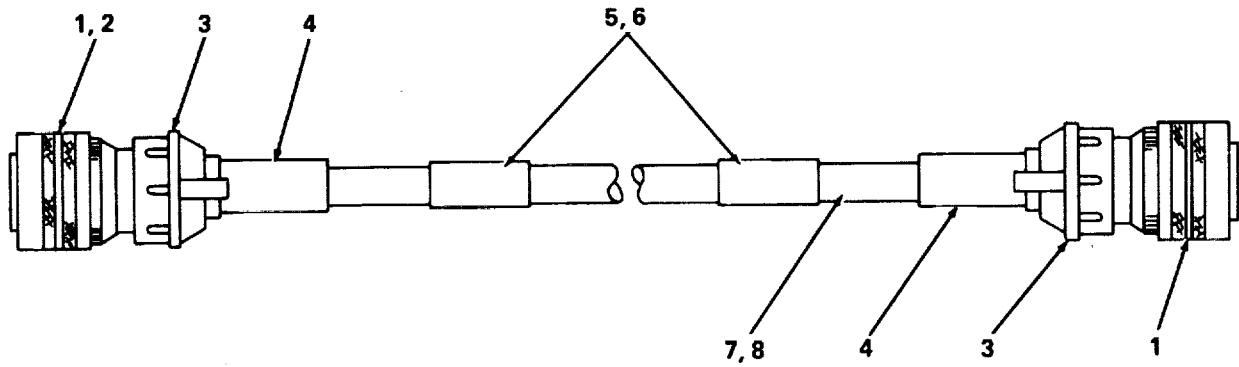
Cable Assemblies 1703-1-3009 (GR1-GR2)
